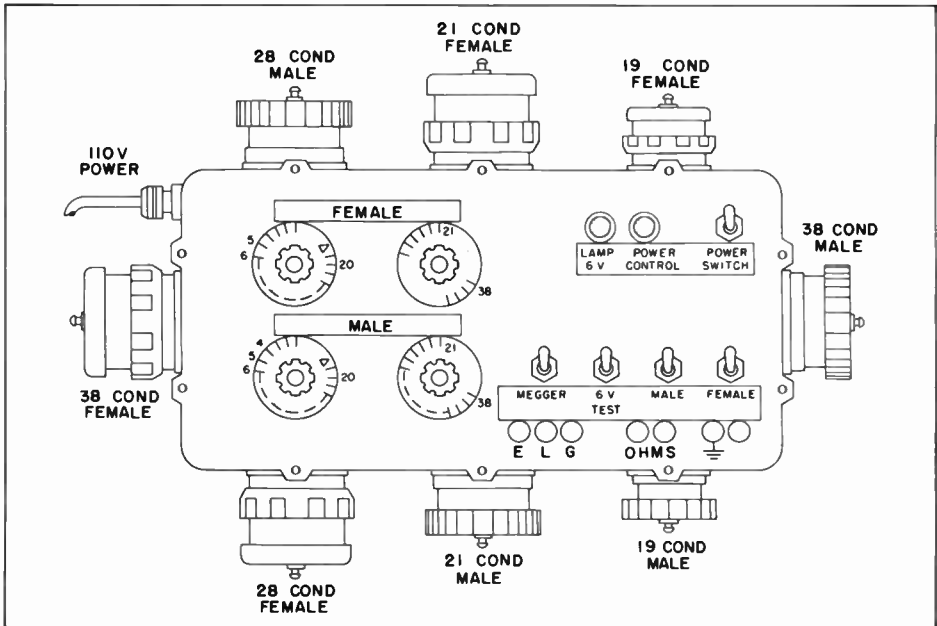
Outline Drawing of Cable Tester, Top View, Showing Placement of Connectors, Switches, Lamps, and Terminals
